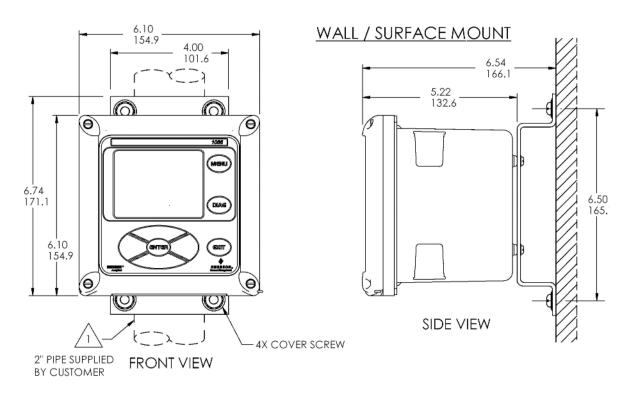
Pipe and wall mounting dimensions (Mounting bracket PN: 23820-00)
